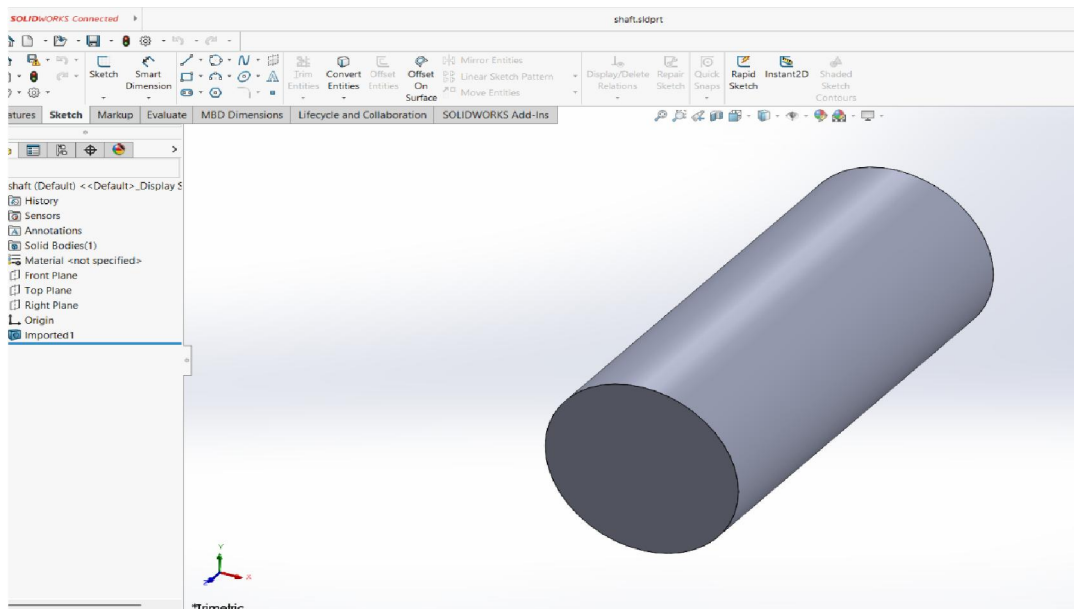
Step 3: - to prepare wheel component 3 (wheel 2 case 2)
